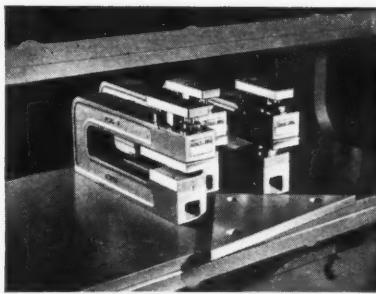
Template set-up of "Hydra-Strip" hole punching units in a press brake. Work in the foreground with shaped and round holes is 3/4 inch thick
